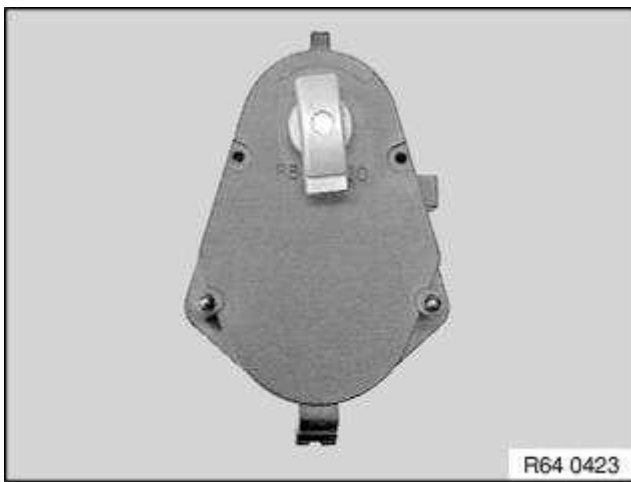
Align Shaft For Defrosting Flaps And Drive
